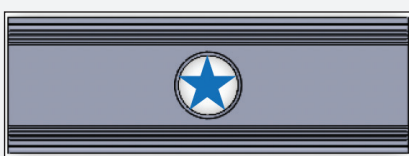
Mount through drill hole, marked with blue star, then press light extrusion into clip
